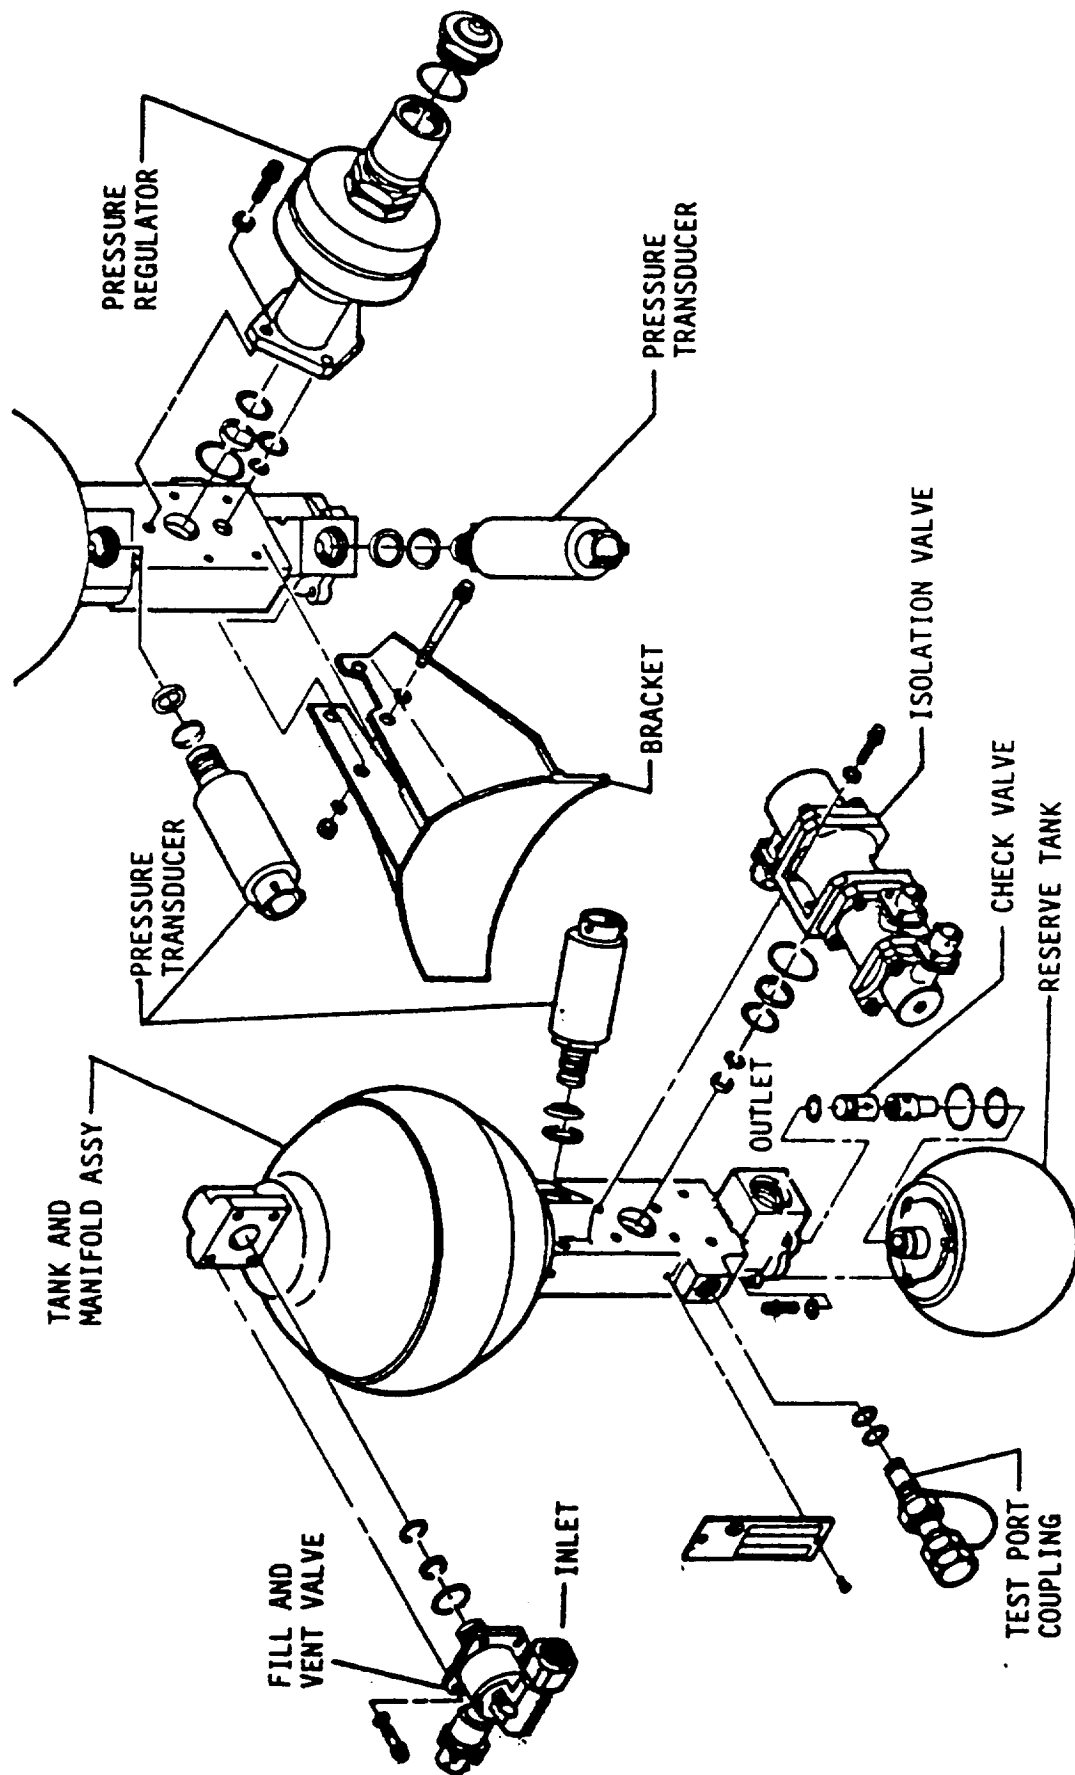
GN2 PNEUMATIC PACK ASSEMBLY
